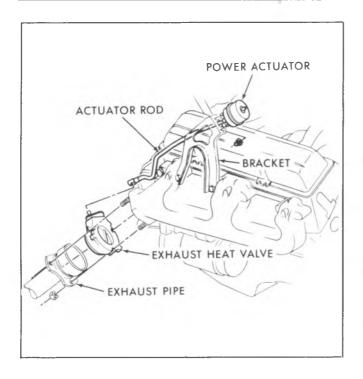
E-17--Actuator and Rod-305/350/400 V8
